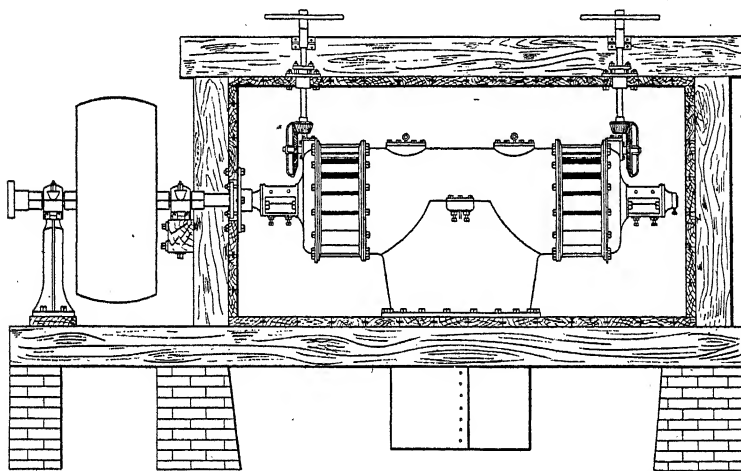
Pair of Turbines in Wood Penstock, Discharging through Single Draft Tube
